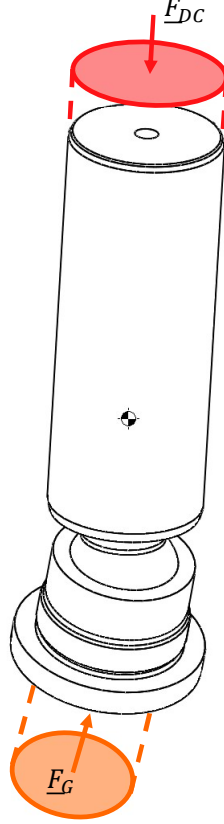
DC and Hydrostatic Pocket pressure projection for Ref P1 axial piston machine
